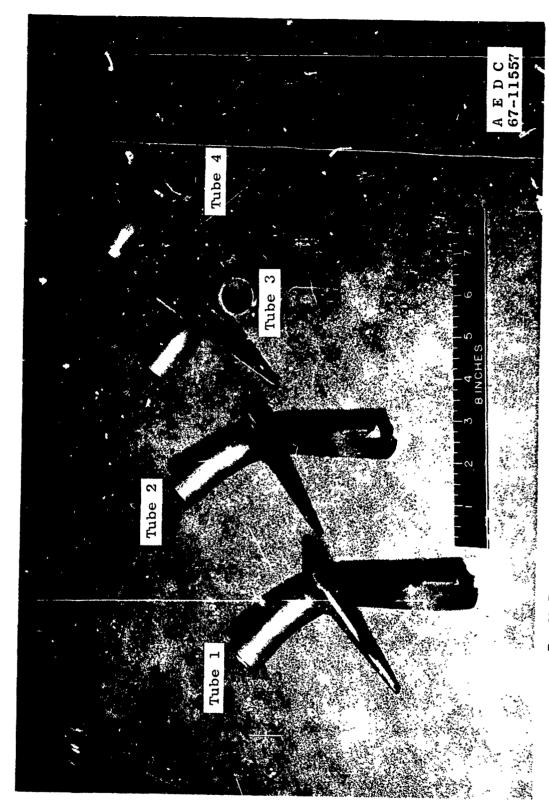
Experimental Oxidizer Pump Primary Seal Drain Tubes, Post-Test Condition
